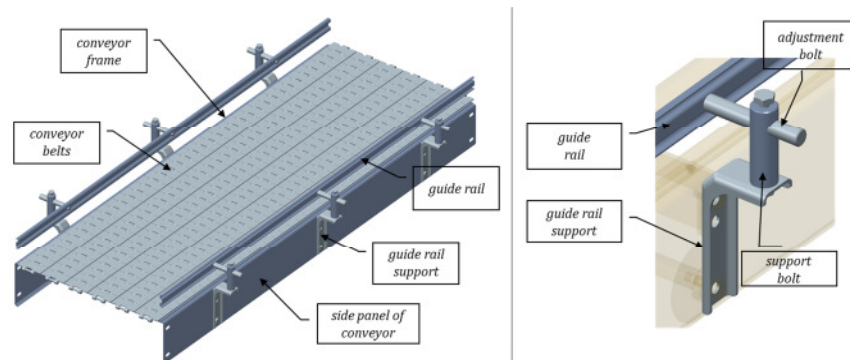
Left side: straight conveyor frame. Right side: close-up of guide rail support and mount
